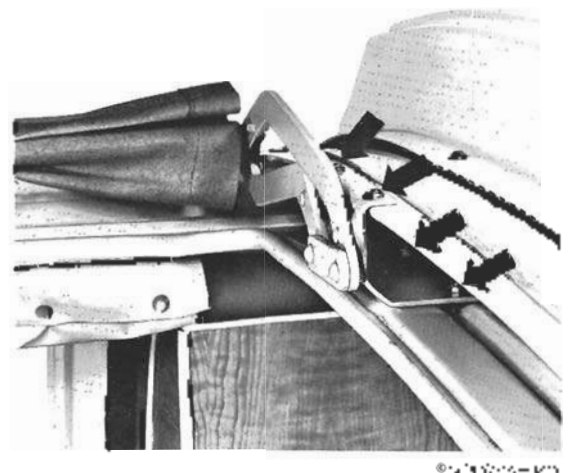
Screws that hold rear hinge. The screws indicated by the left two arrows are threaded into the roof frame. The screws indicated by the right two arrows have self-locking nuts (visible).
